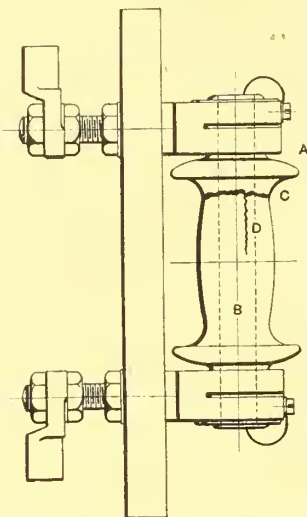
OLD TYPE TUBULAR HAND-GRIP FUSE, SHOWING TYPICAL FRACTURE.
